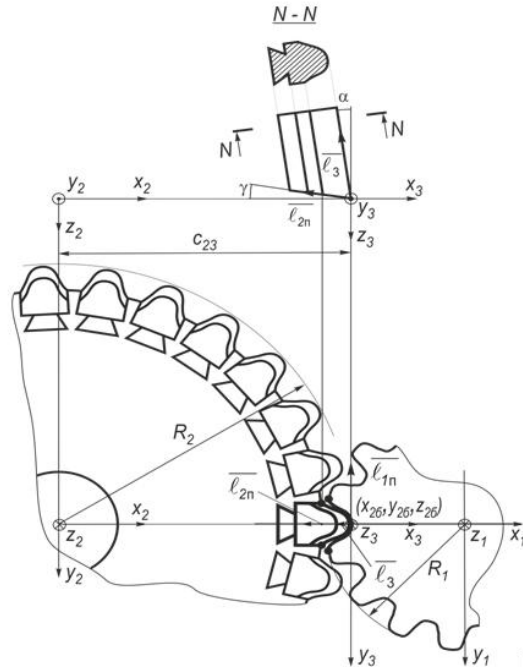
To calculation of the profile of assembled shaping cutter with prismatic shaped cutters
